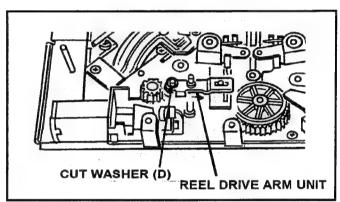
Removal of Reel Drive Arm Unit
